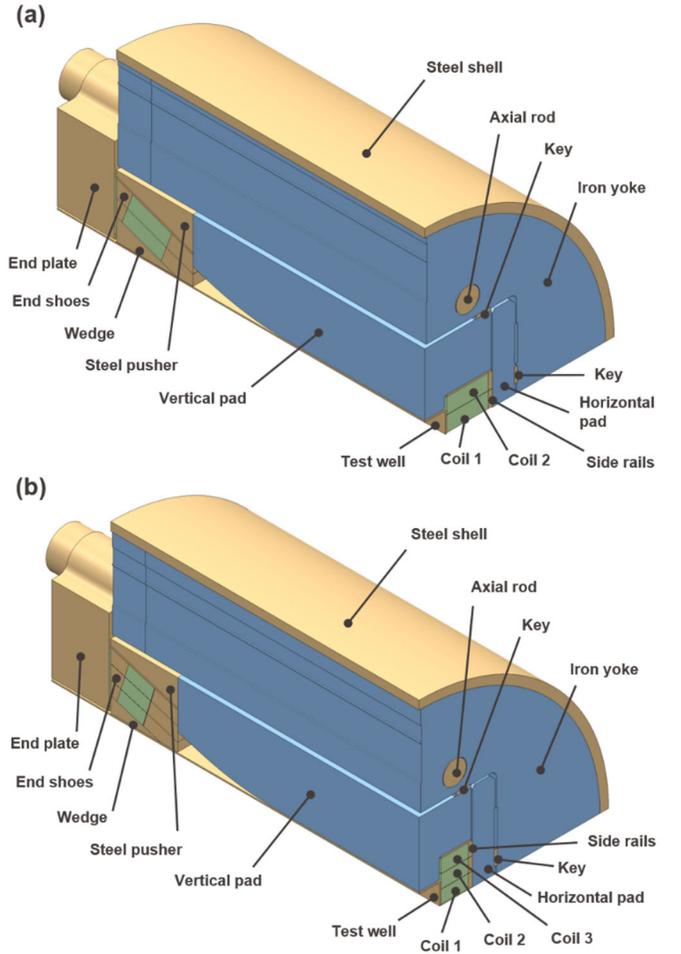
One octant 3-D geometry of the considered magnet design alternatives: (a) 4-coil design: 2 double-pancake coils per magnet pole. (b) 6-coil design: 3 double-pancake coils per magnet pole.
